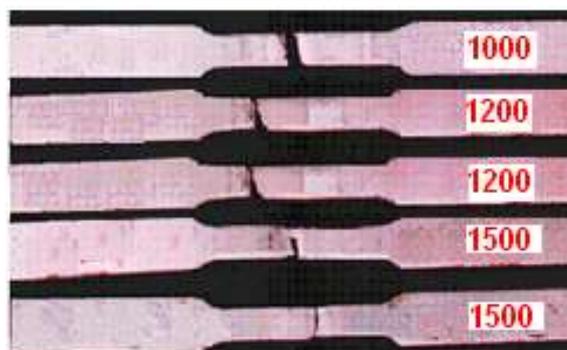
Al 6061 + 20wt.%SiC specimens after fracture.
